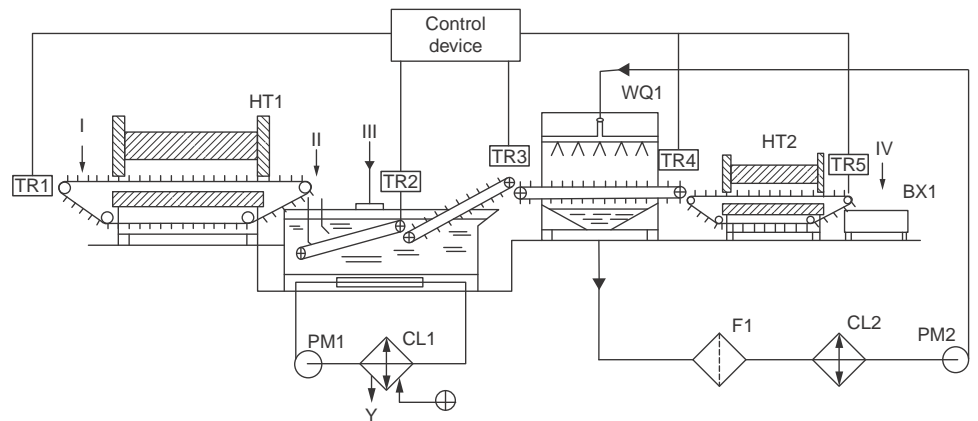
Schematic of continuous-type intensive quenching system. I, loading point for steel parts onto the conveyor for heating in furnace HT1; II, chute with intensive cooling devices; III, quenching tank with two conveyers; IV, unloading point of steel parts from furnace HT2; TR1 to TR5, speed-control units for conveyor belts 1 to 5 operated by the control device; HT1 and HT2, furnaces 1 and 2; WQ1, washing and quenching device; PM1 and PM2, pumps 1 and 2; CL1 and CL2, chillers 1 and 2; F1, filter; BX1, container for heat treated parts. Source: Reprinted from Ref 3 with permission of ASTM International
